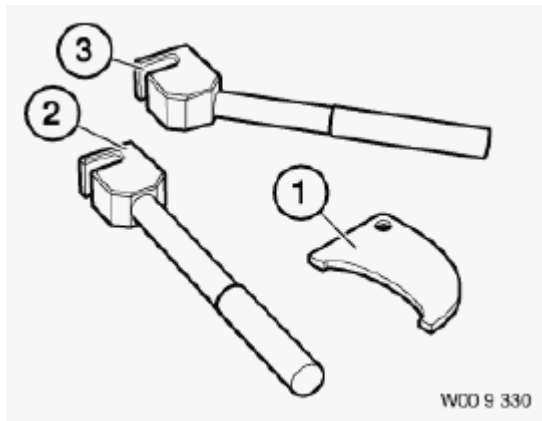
Windscreen Wiper Setting Tool (00 9 330)
